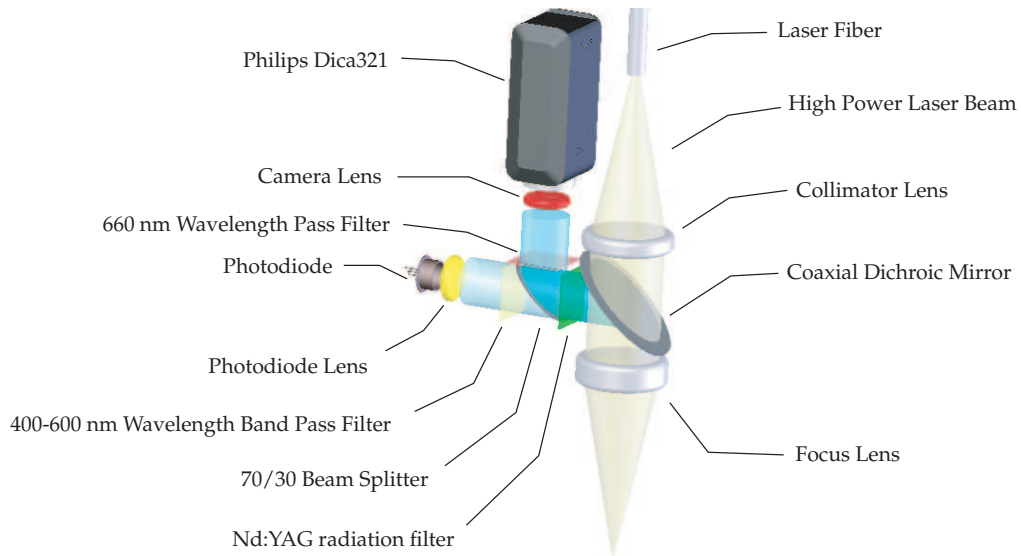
Complete optical components path of the integrated welding head.
